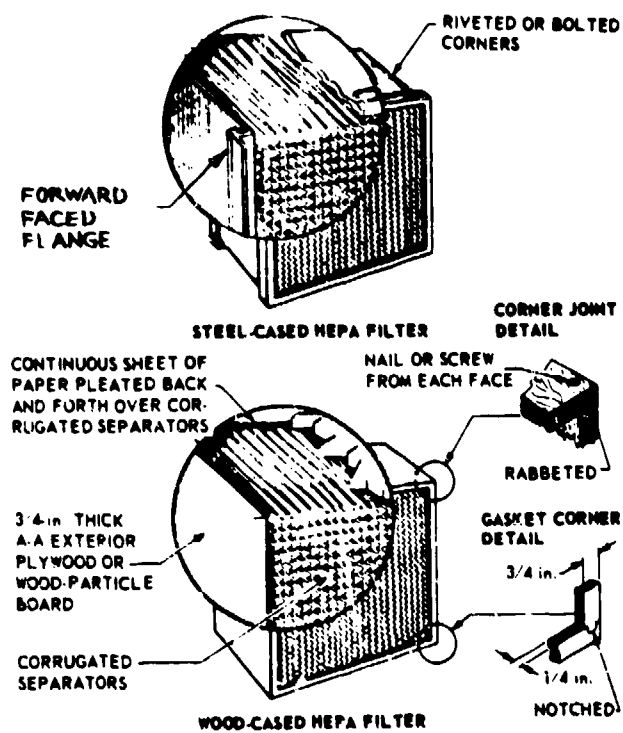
Construction Details Of Open-Face HEPA Filters
